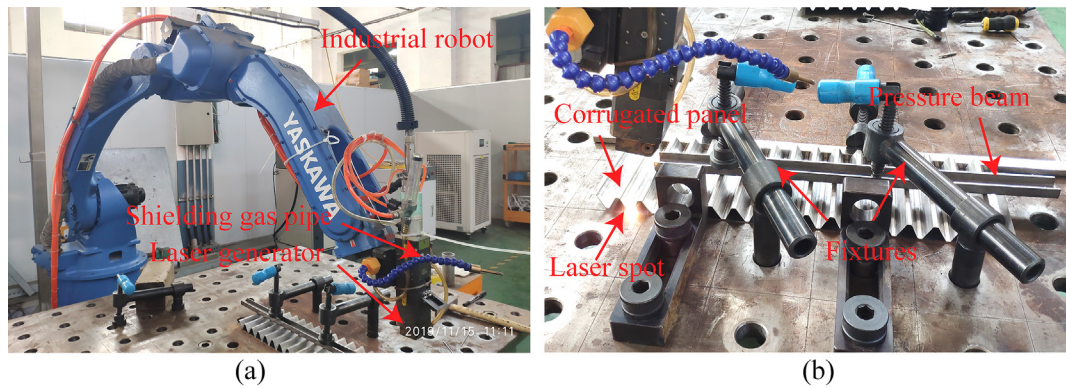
(a) Fabrication setup of laser welding and (b) detailed fixture of laser welding process.
